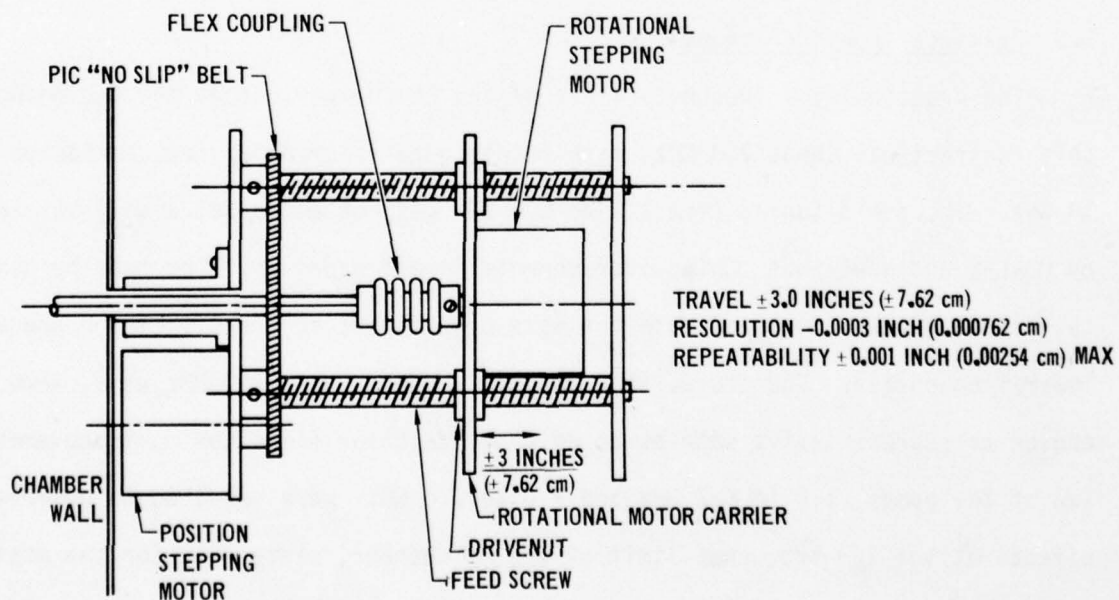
LONGITUDINAL AND ROTATIONAL STIRRING MECHANISM
